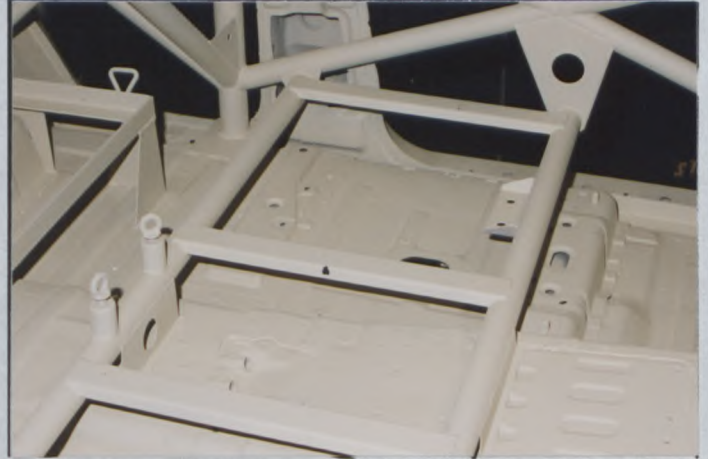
SEAT BRACKET AND LONGITUDINAL
